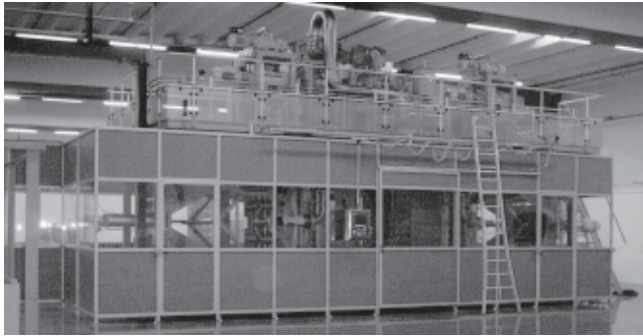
PECVD bottle coating machine (BC-2 by Tetra Pak) consisting of two batch coating modules for 100 bottles each. The bottle (un)loading system for the carriers is still to be placed on the opposite side.
